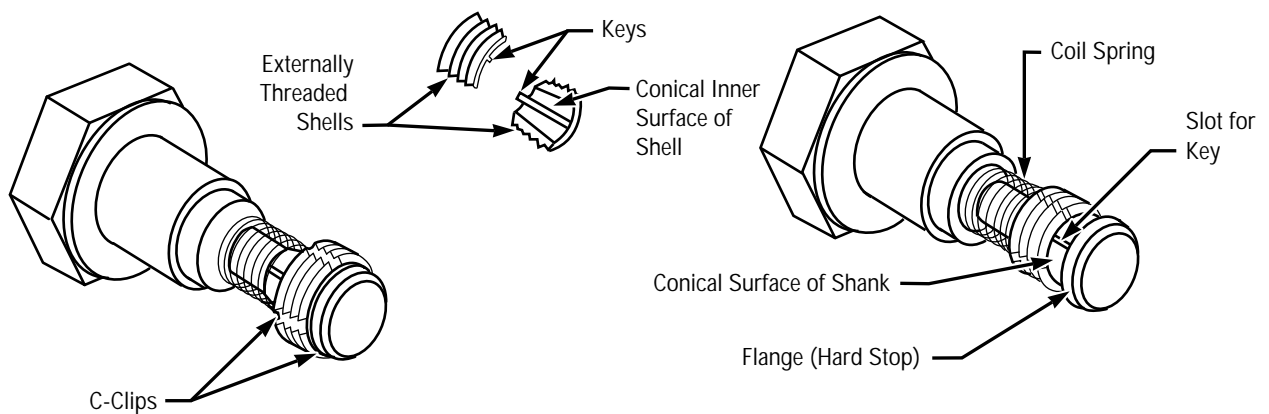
Left, threads in normal position, as when standing freely or during engagement in thread hole; right, threads pushed back, as during insertion into threaded hole.
